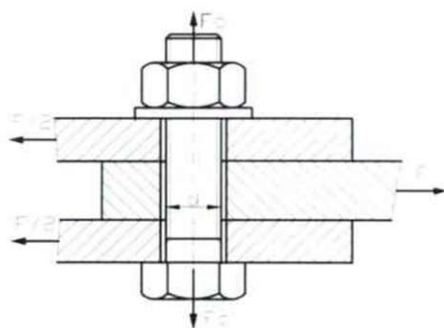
Assembly with screws mounted with clearance, loaded with transversal forces
